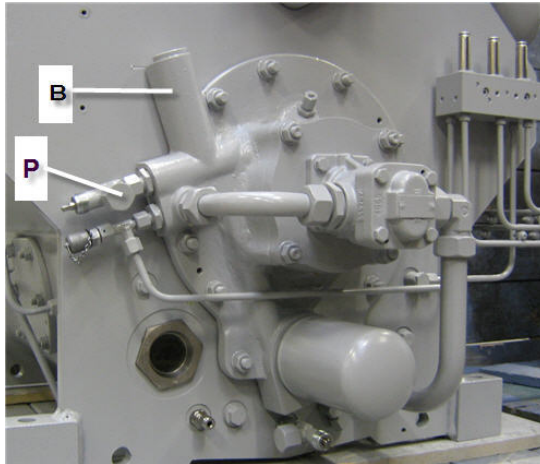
Pre-lubrication valve (P), Oil control pressure regulator (B)
